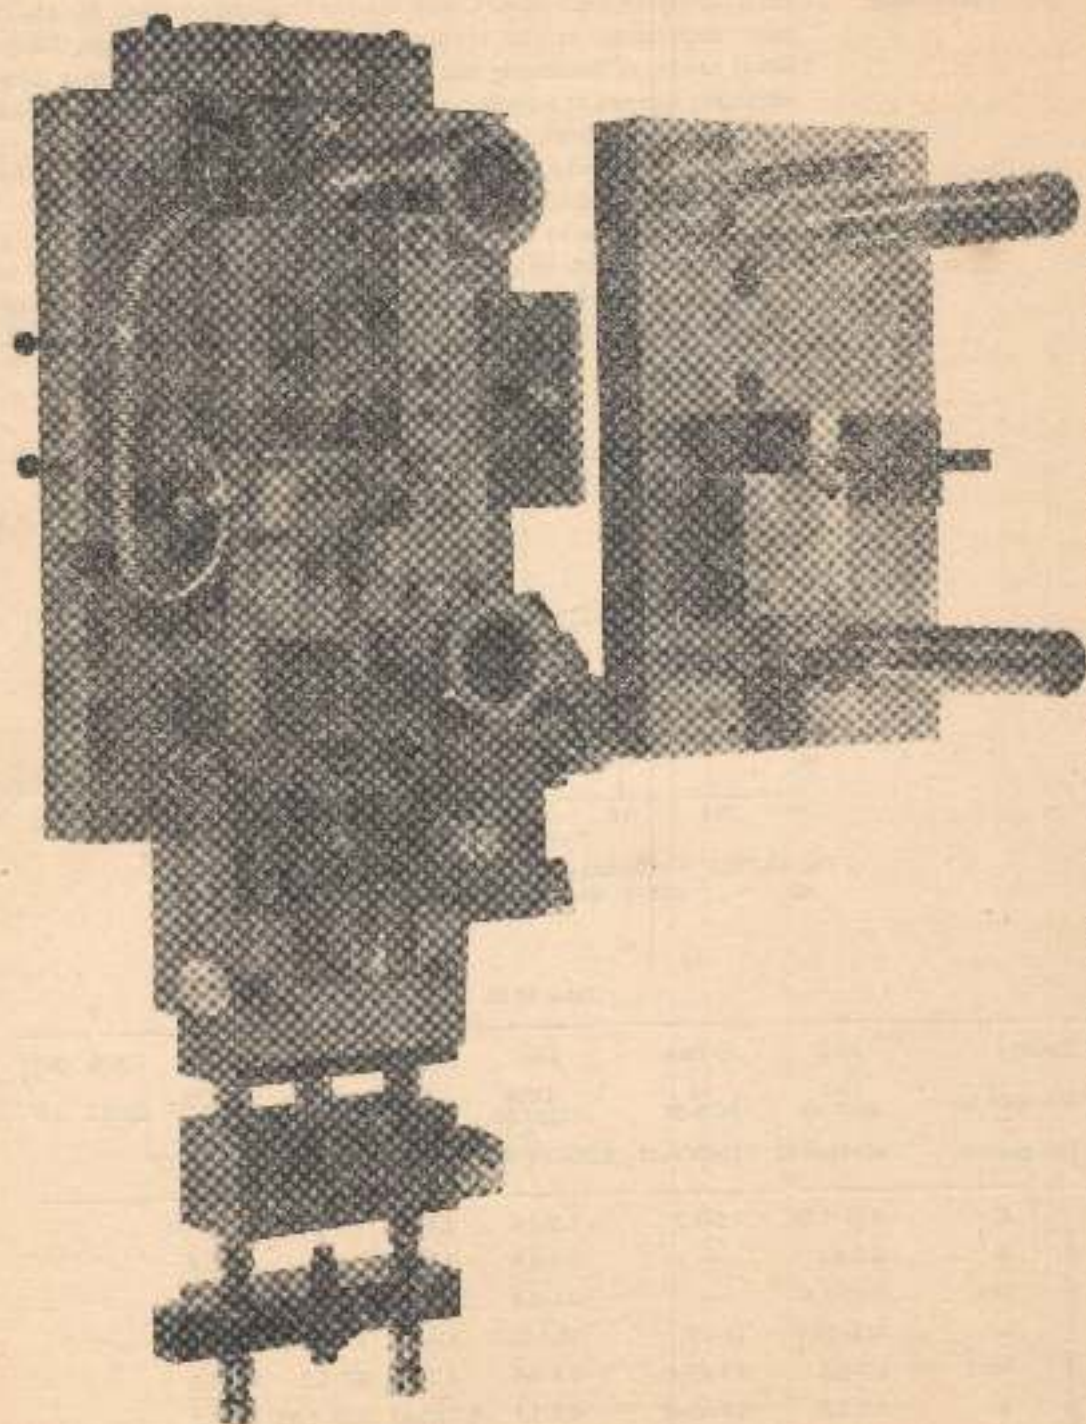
(a) Blanking tool for cutlery manufacture, steel—ISO 210Cr12 (Courtesy: VEW, Austria)
